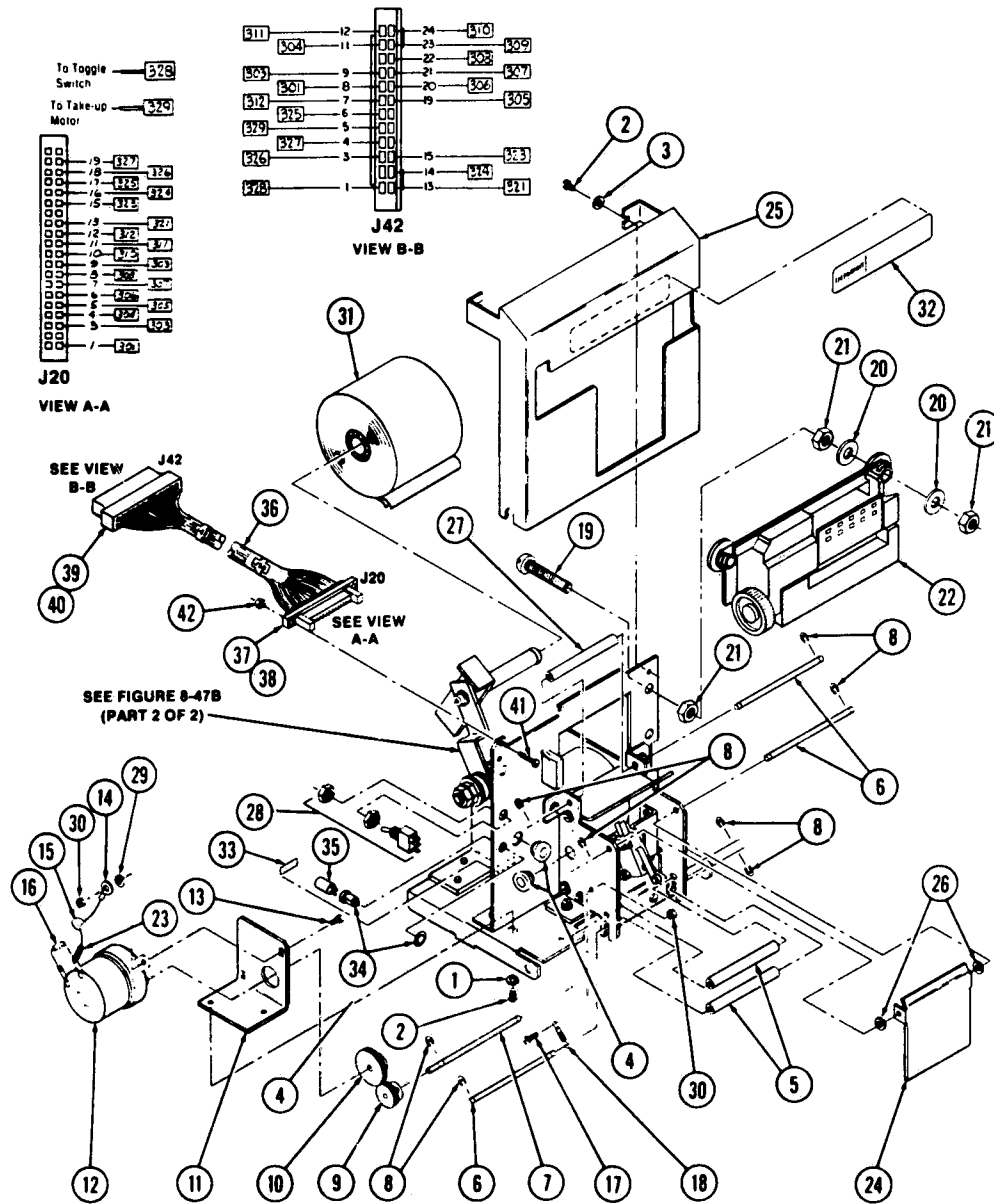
PRINTCON PRINTER ASSEMBLY (Part 1 of 2, Units Before 6/85).
